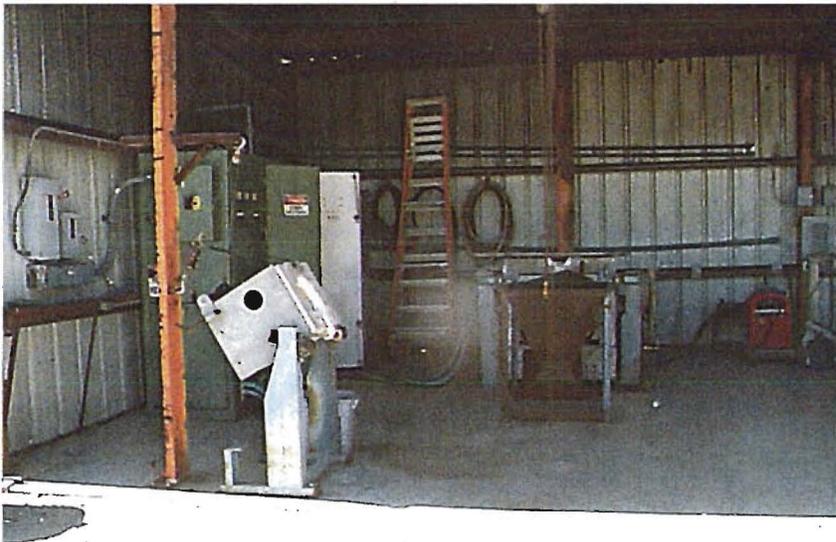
Taken by E. Seum on 7/11/01. Shows furnaces and electric panels inside shop area on the ERI Mill Site #1 mill site.
